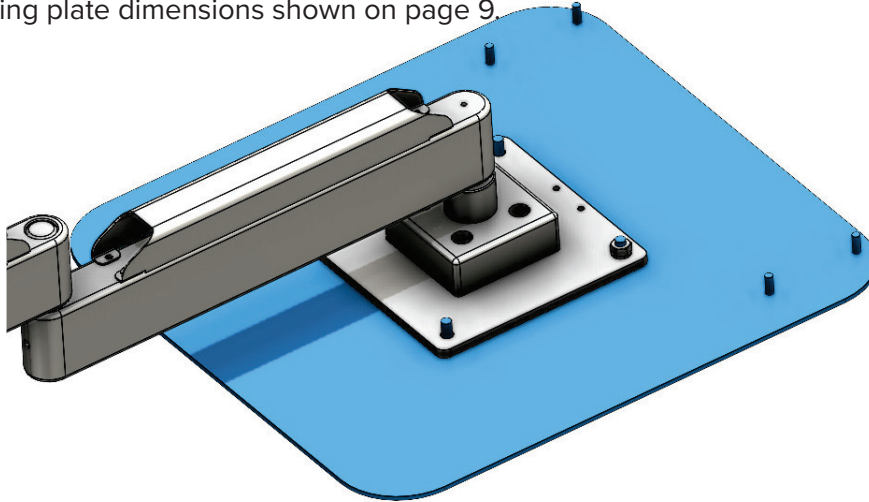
103-335, step 1 (shown in blue) Sold Separately
